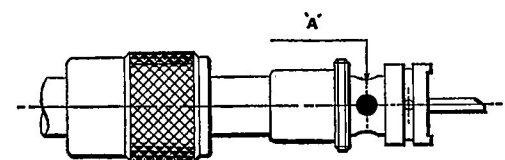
G—Assembly instructions—C Type plugs and sockets—Elbow plug—UK cable clamp
